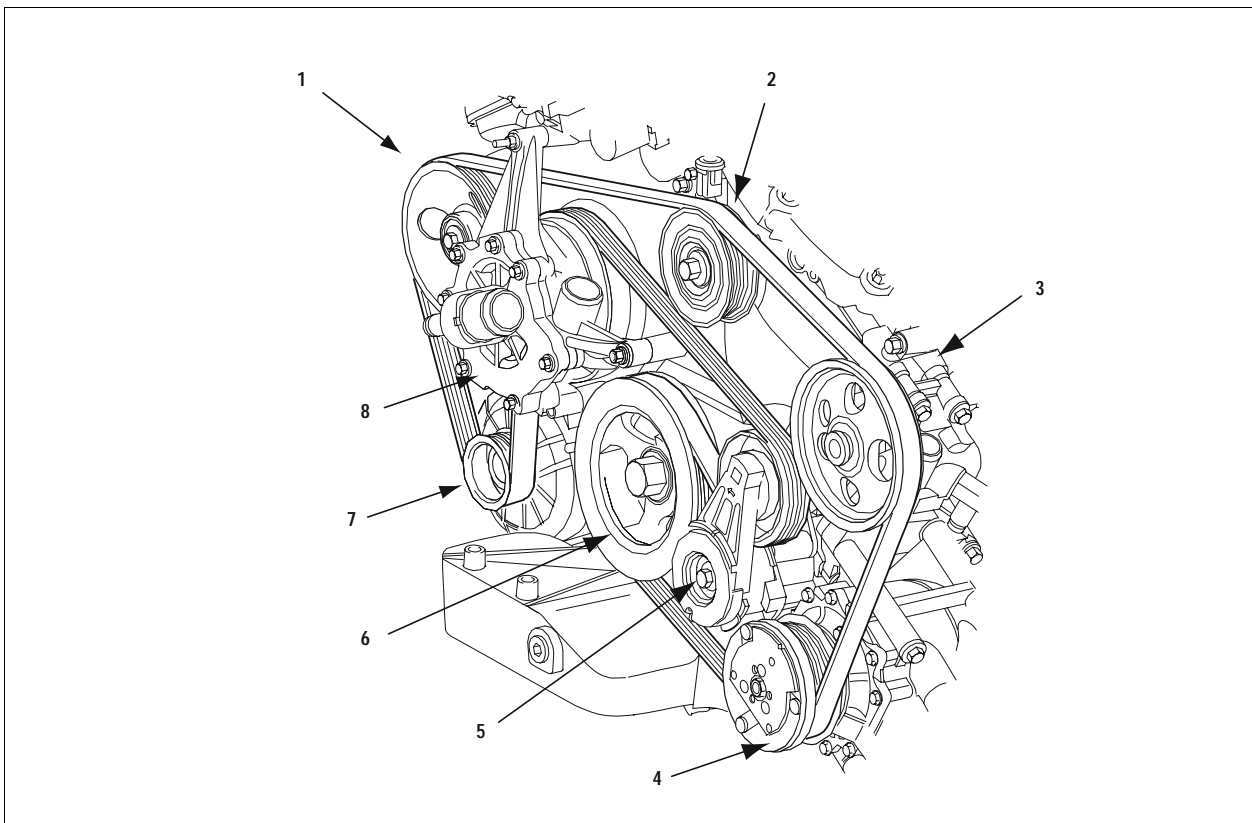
ENGINE ACCESSORIES AND DRIVE BELT (AJ60 S-TYPE)
